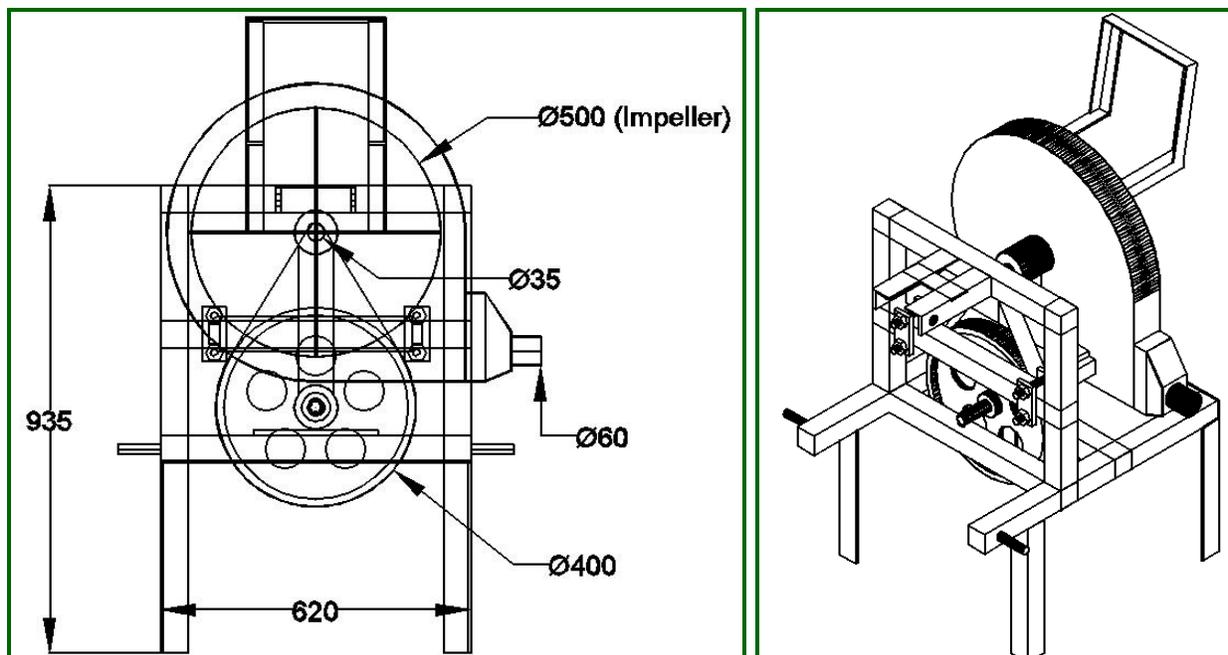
Front and isometric view of gas sucking machine (All dimensions are in mm).
